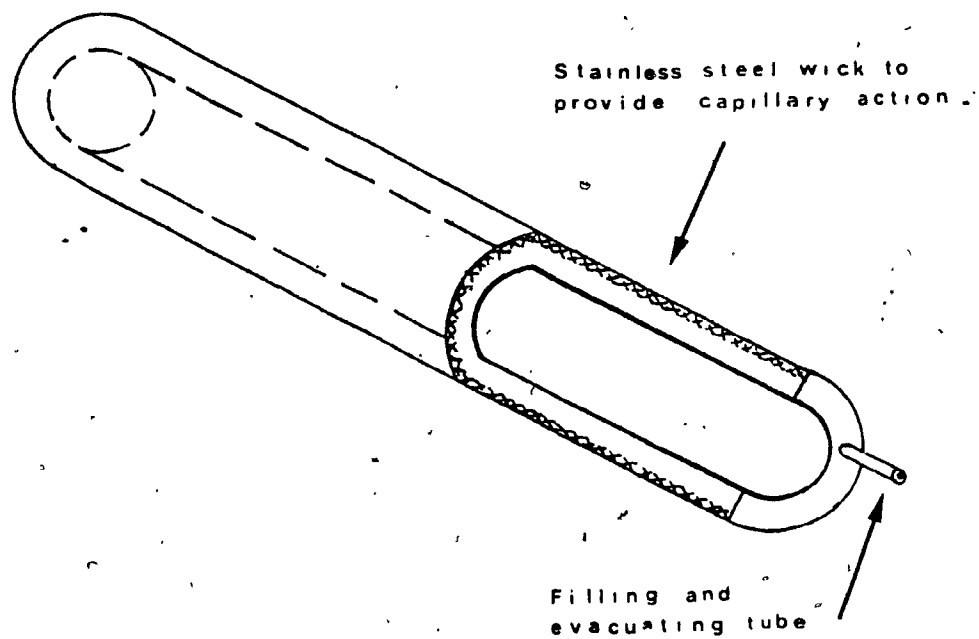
CROSS-SECTIONAL VIEW OF HEAT PIPE
